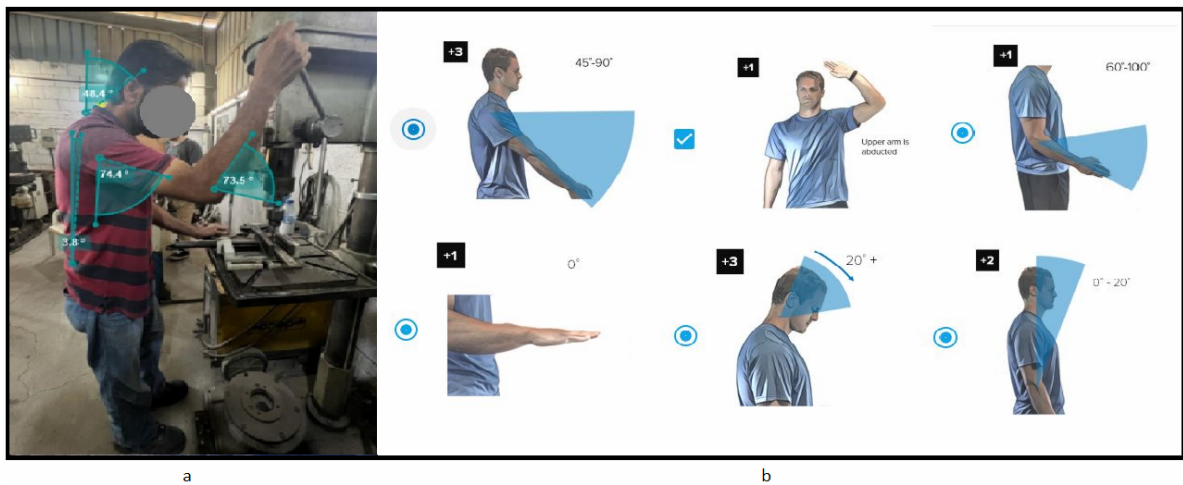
(a) An operator performing a drilling task (b) RULA assessment - drilling task
